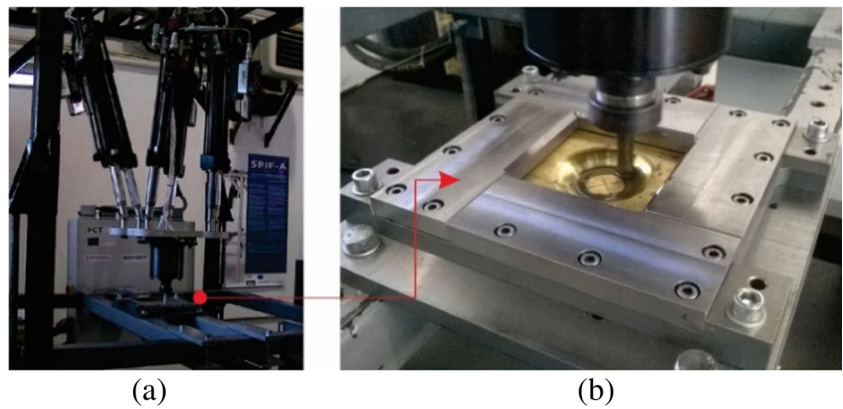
(a) SPIFA machine; (b) Forming conical frustum Cu – 35Zn brass alloy
